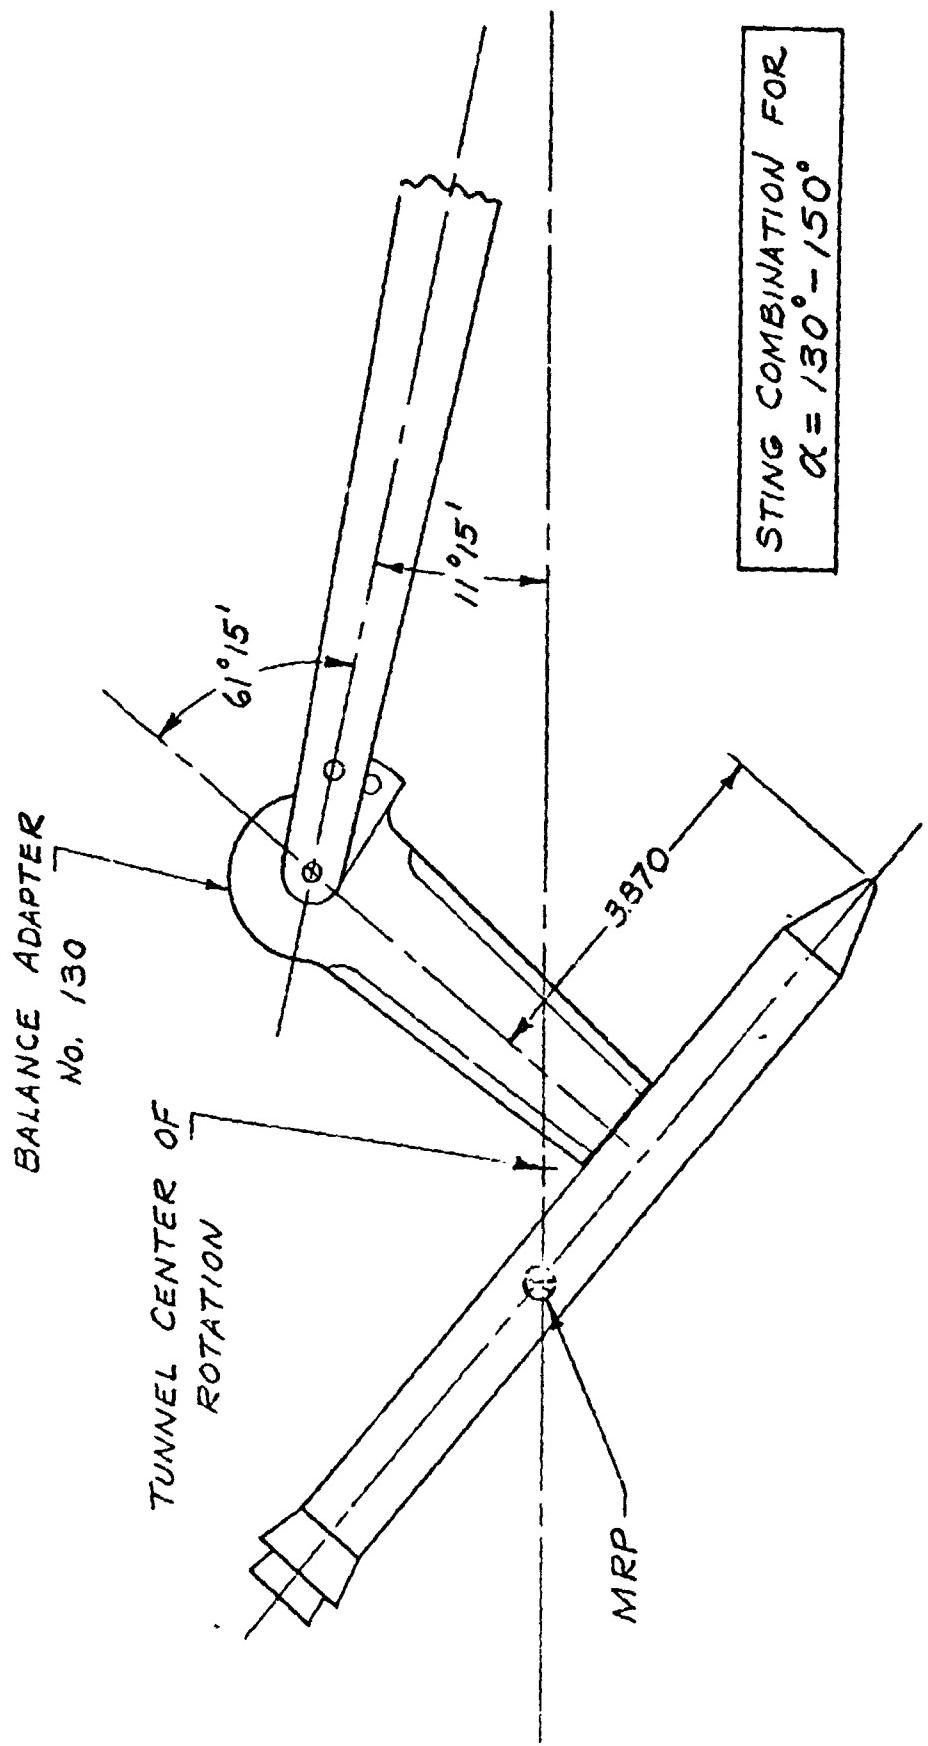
Typical Setup for Special 90° Side Mounted Sting.
